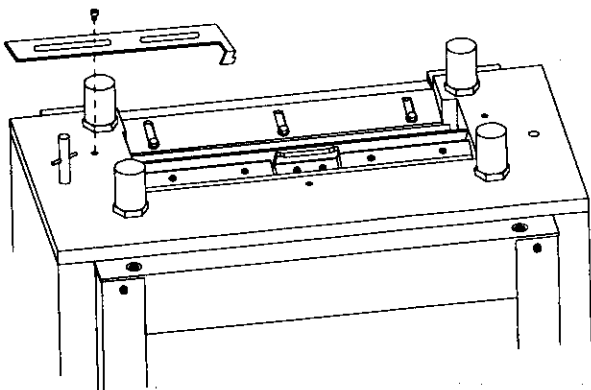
Installing Cutter Bits and Knife Setting Gauge
